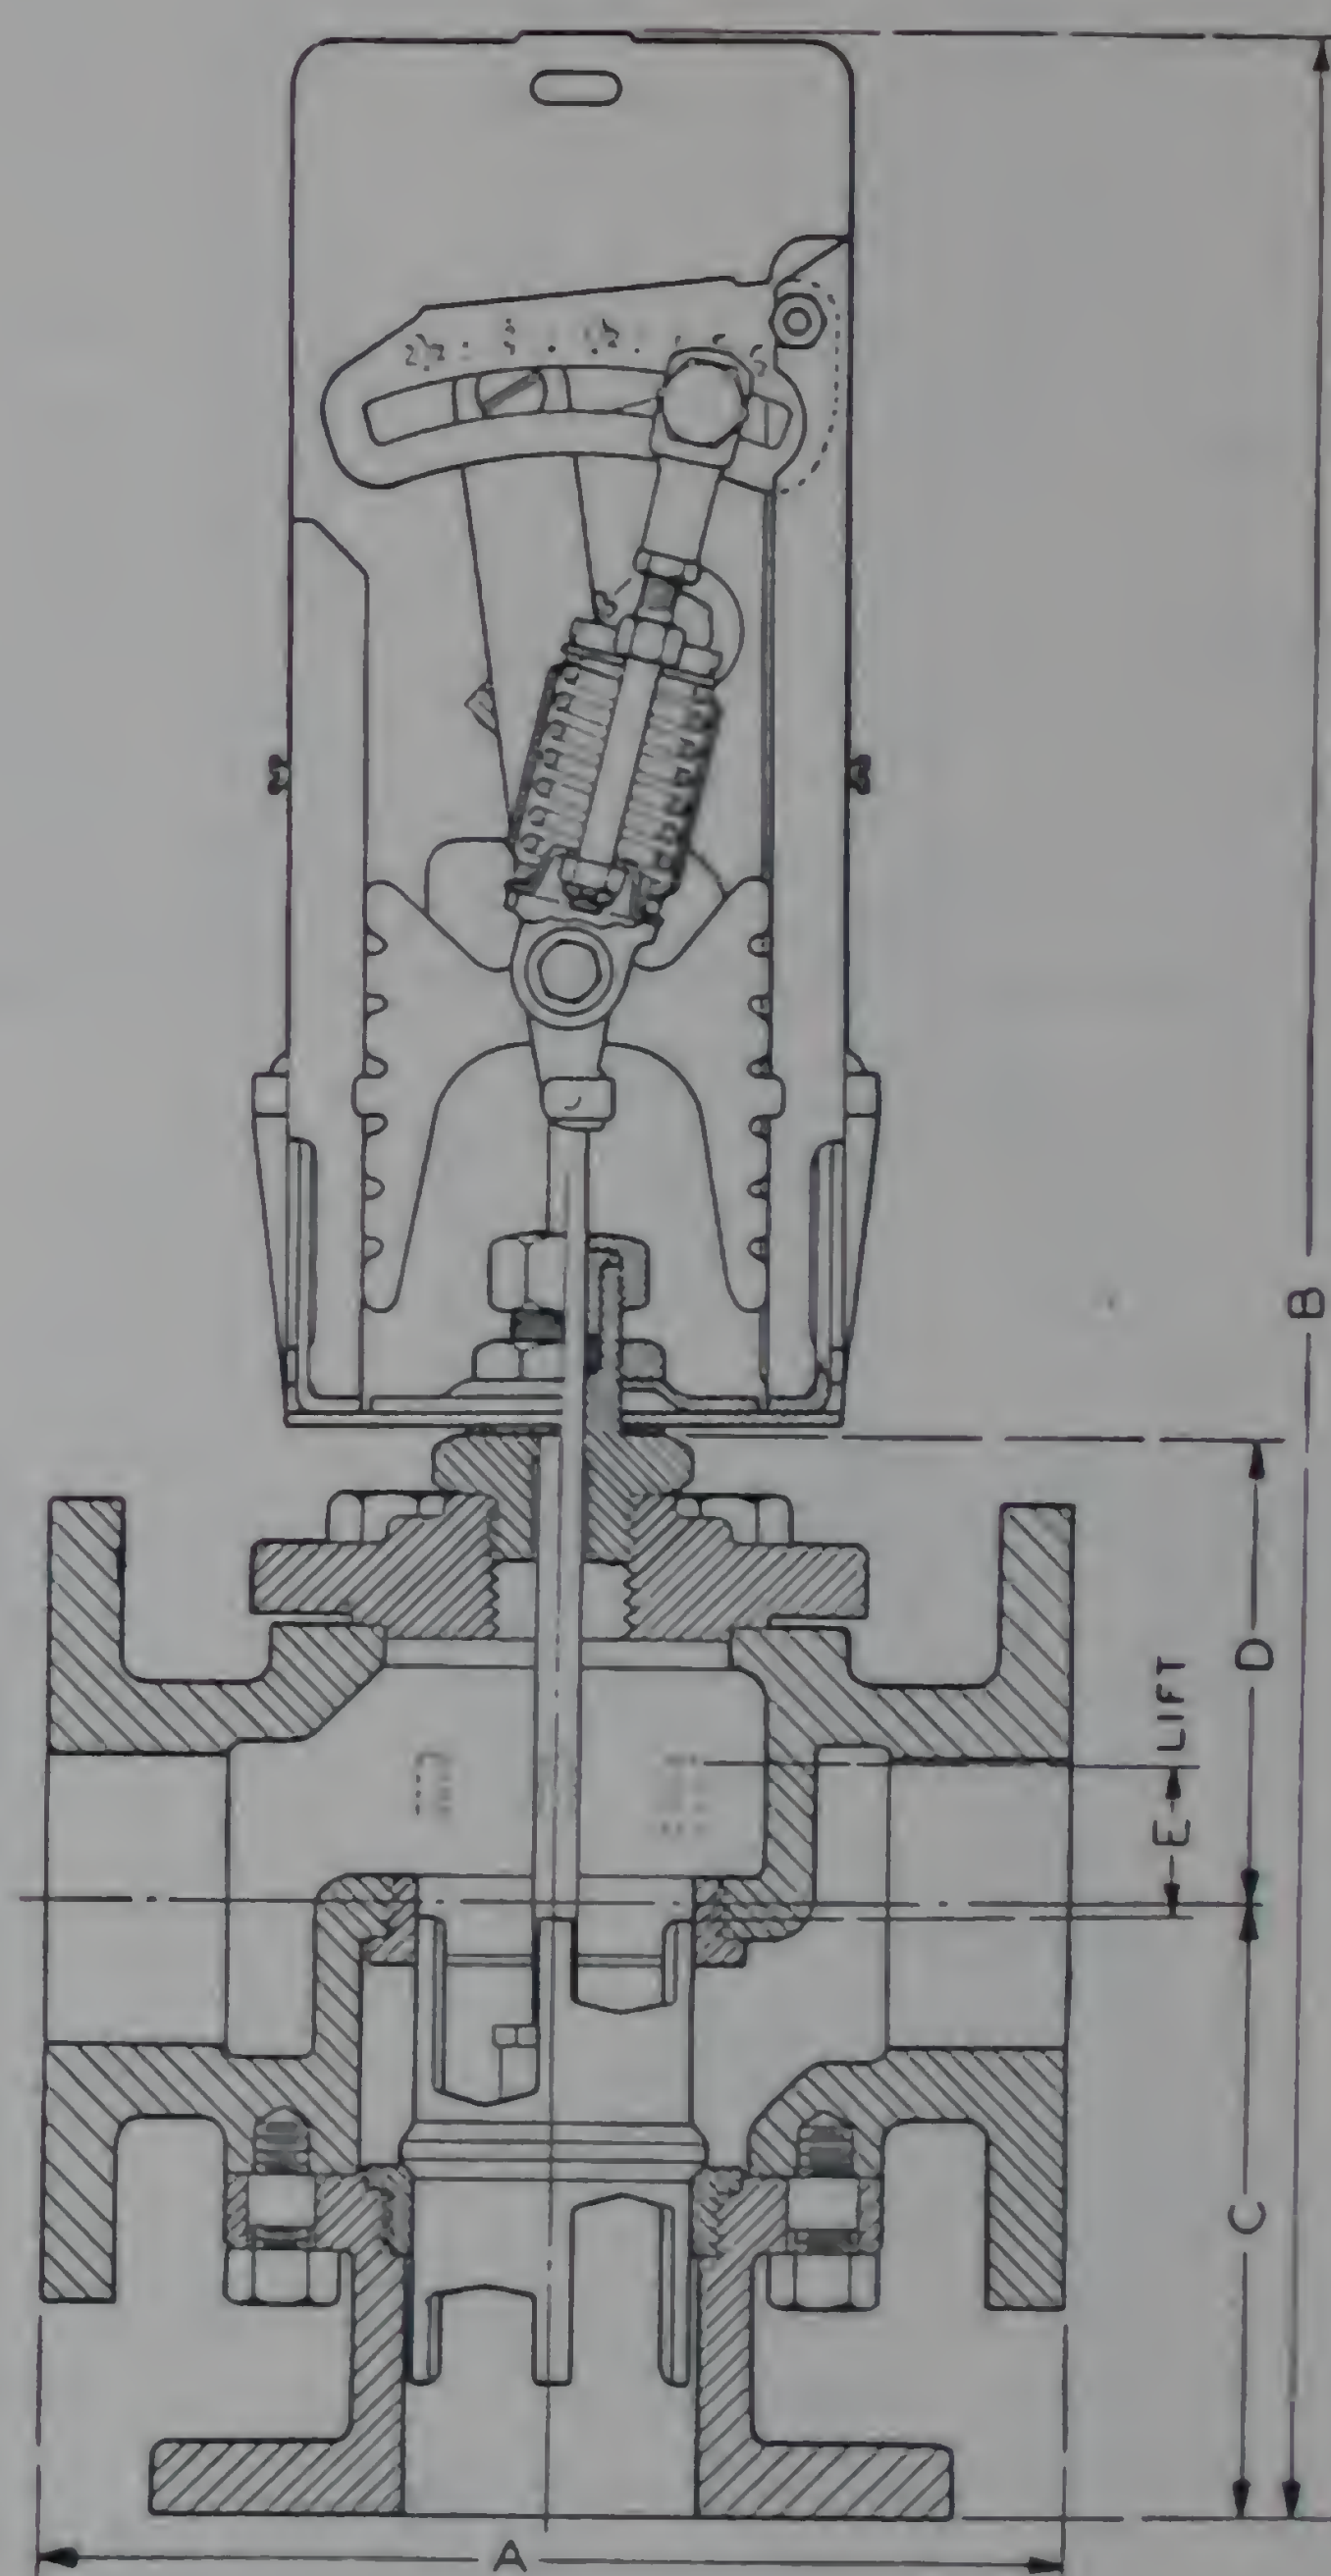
Dimensional drawing of flanged Type K203 Motorized Valve.
